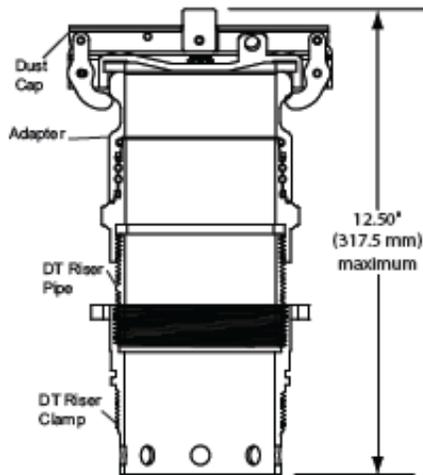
Drop Tube (DT) Riser Clamp Assembly Dimensions
